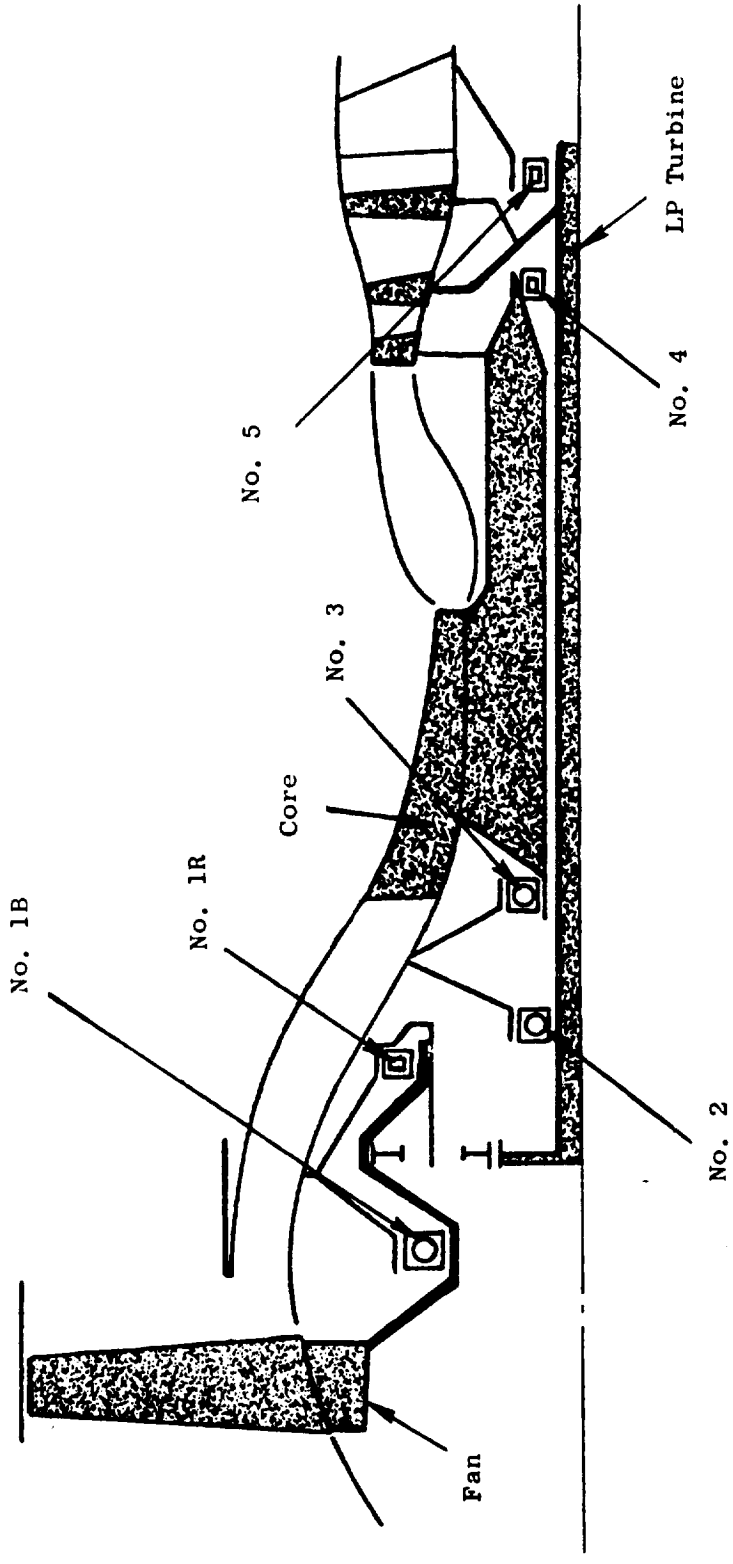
Schematic of UTW Engine Bearing Arrangement.
